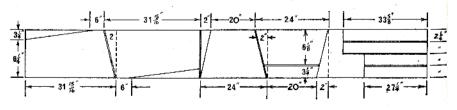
Layout of the components used for making the wood frame of the solar extractor. 10 N.Z. BEEKEEPER
